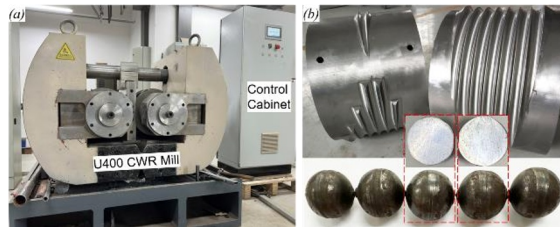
a U400 CWR mill used in the experiments and b rollers and experimentally obtained bearing steel balls
